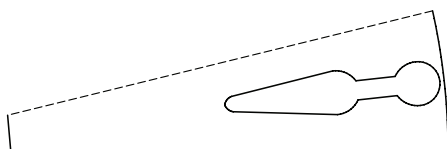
Slot shape for the rotors used in the 15 kW machine.
